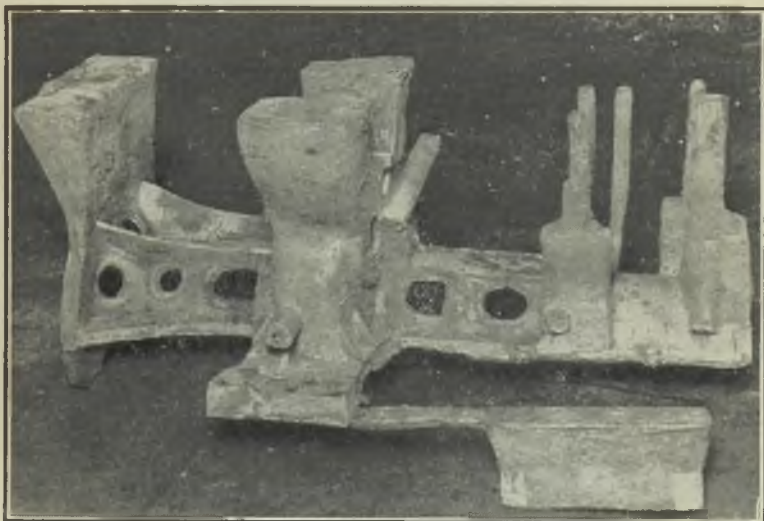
FEEDING-HEAD ARRANGEMENTS FOR A VERTICAL PUMP FRAMING.
